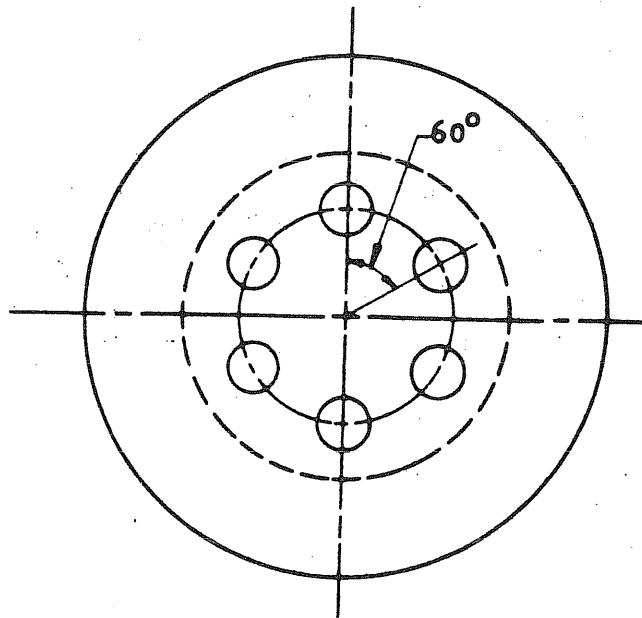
VESSEL PV18 WITH SIX 4-in. PENETRATIONS ON AN 8-in.
